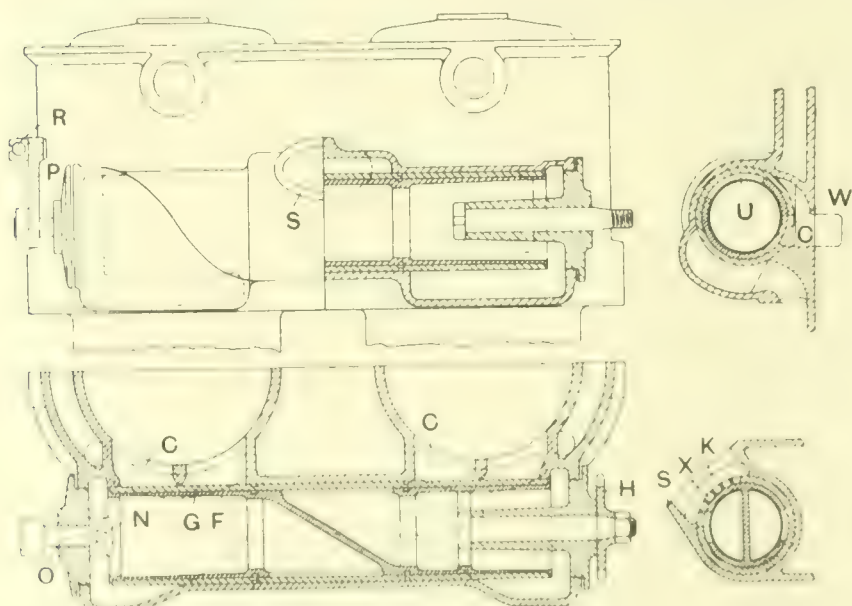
ROTARY DISTRIBUTING VALVE FOR INTERNAL-COMBUSTION ENGINES.
